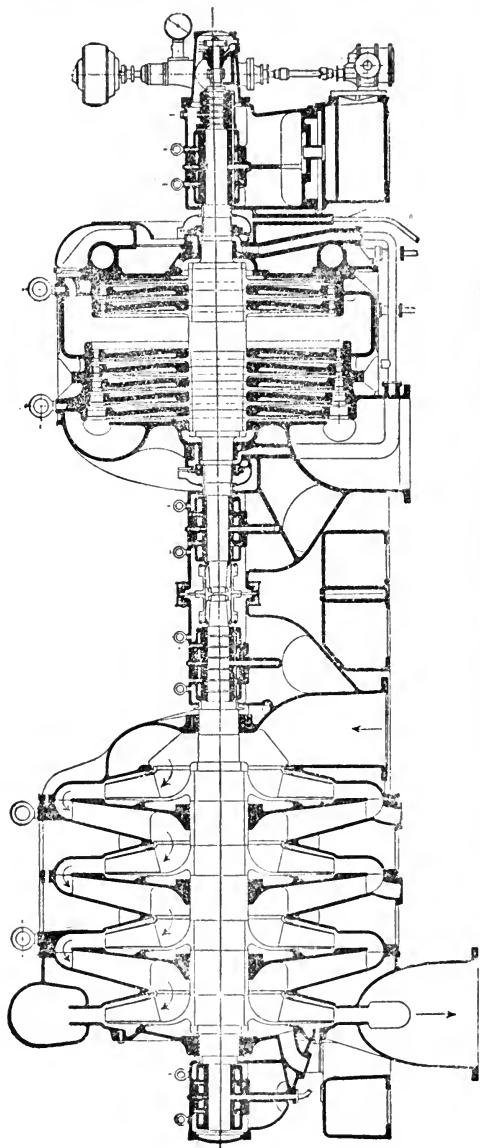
Turbo-compressor coupled to Impulse Steam Turbine
